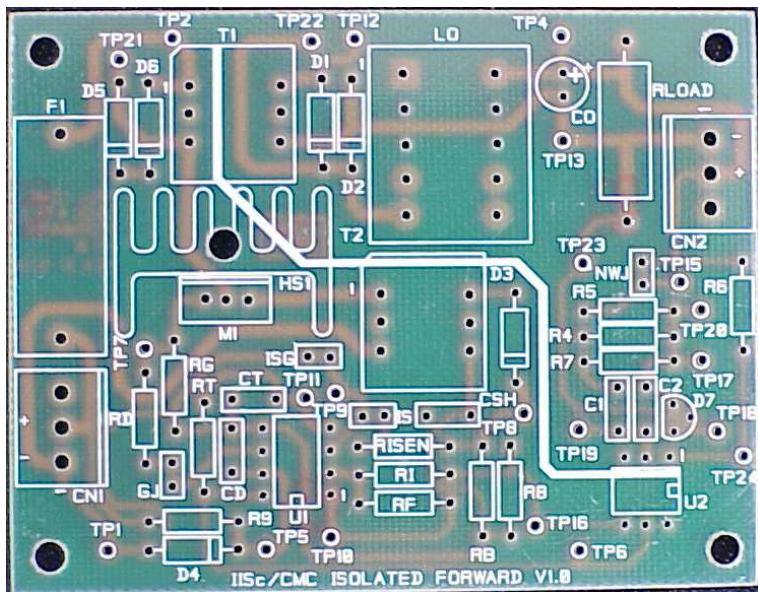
Bare PCB Board of the CMC-forward Converter
